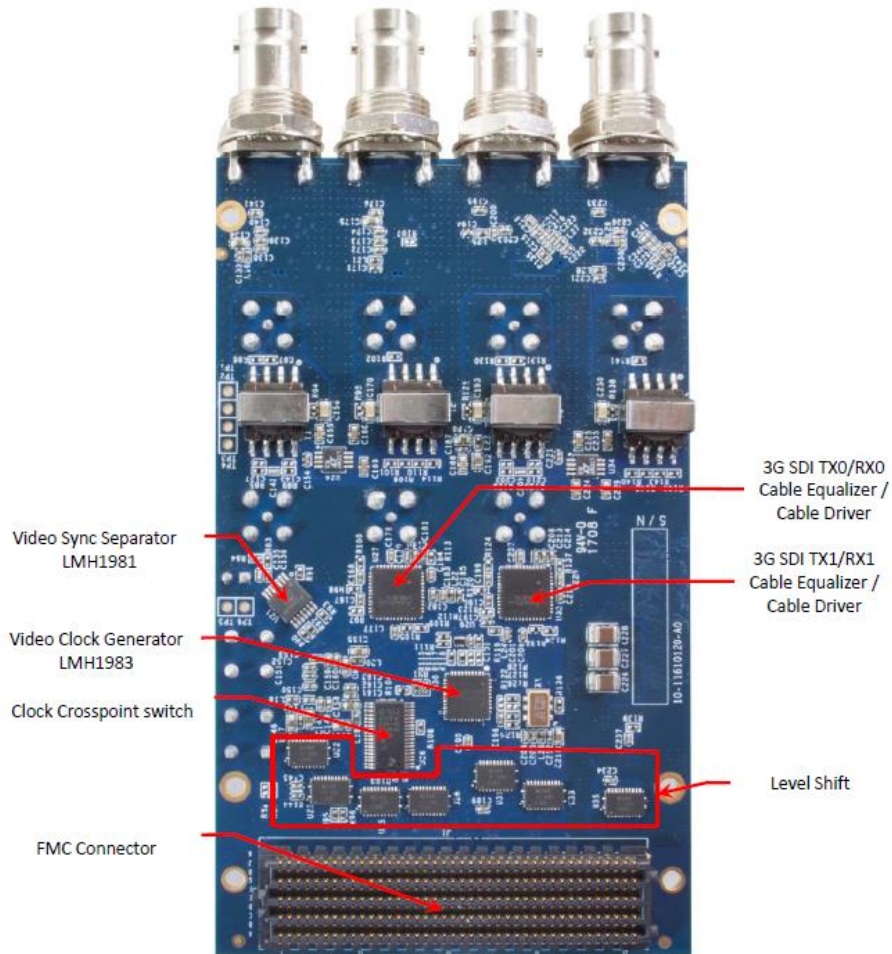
Bottom view of the SDI-FMC Daughter Card
